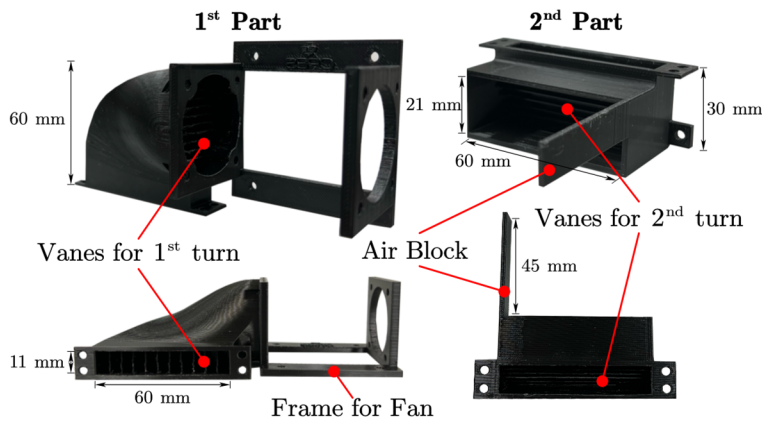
The AD-IVB is 3D printed into two parts to show the internal vane design.
